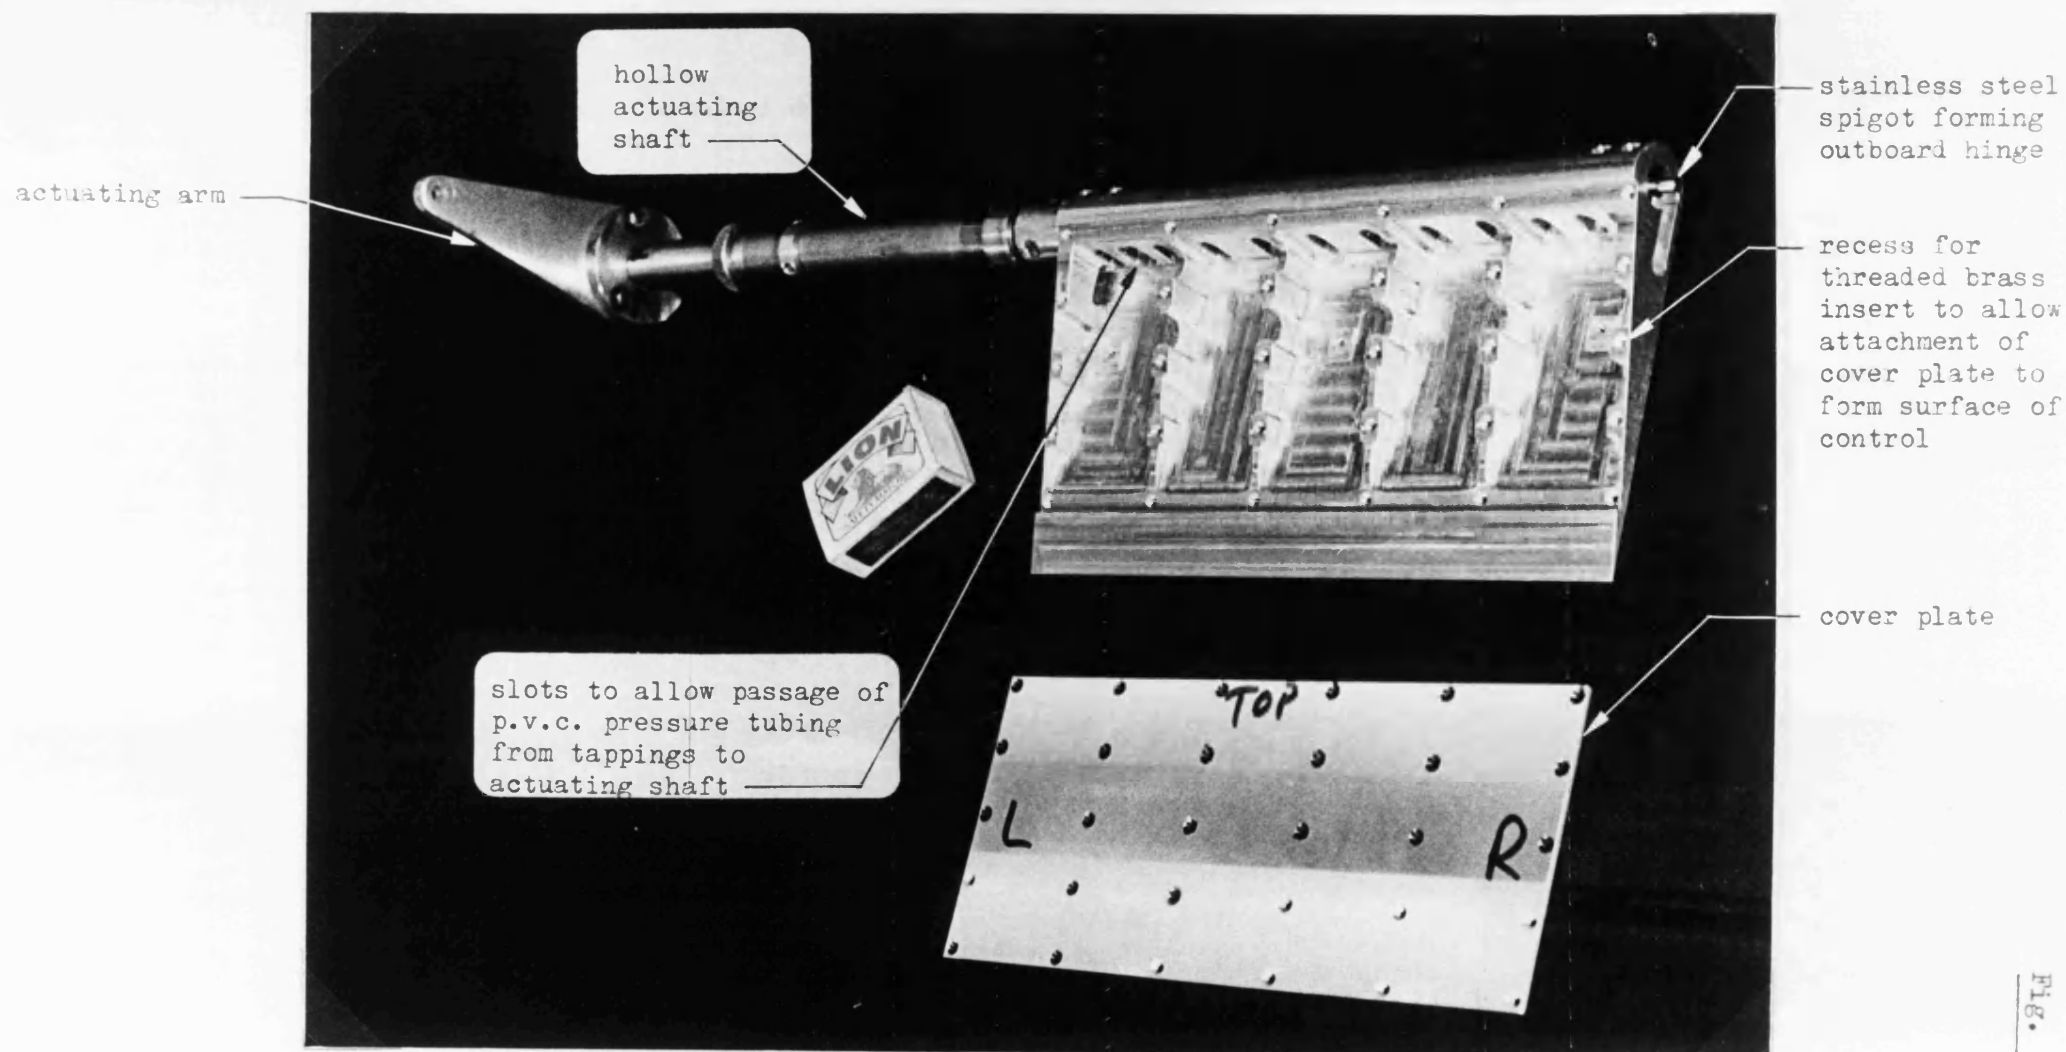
Control surface and actuating shaft - machining of control surface incomplete and pressure tapings not installed.
